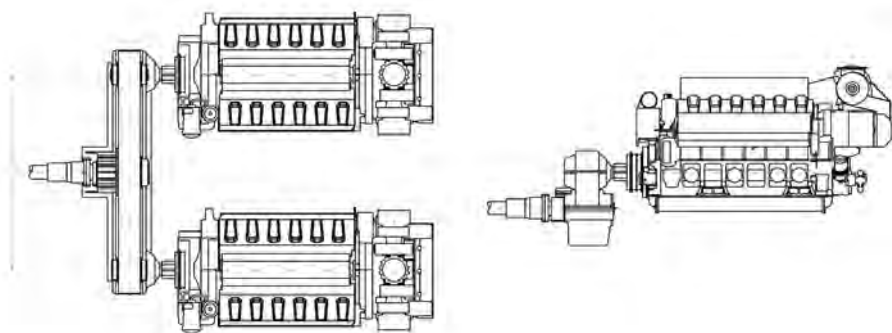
Crankshaft centre distances, V-engines (DAAE034187b)
